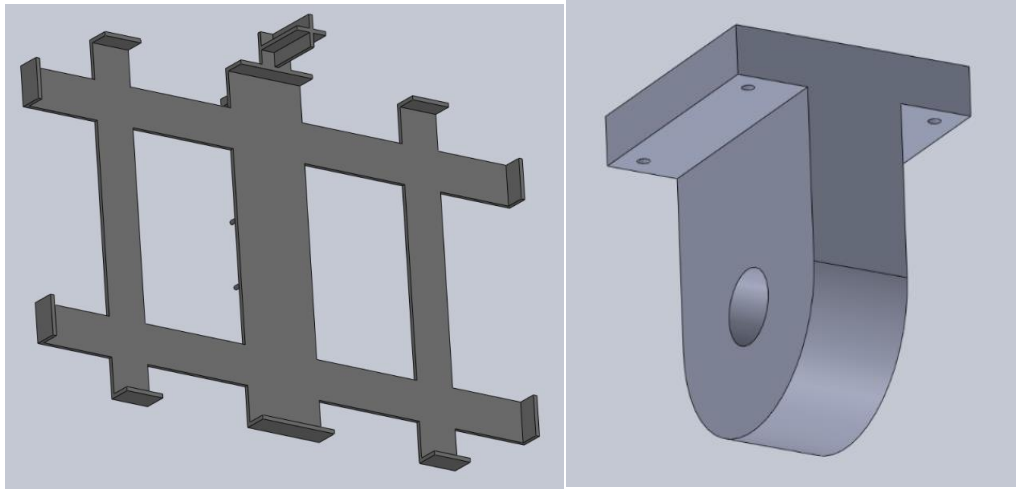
a) Solar panel mounting apparatus b) Movement part between vertical holder and mounting apparatus
